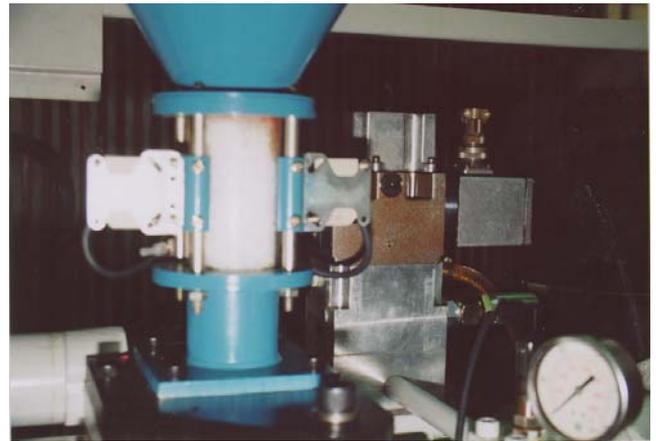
MOOG servo valve on the injection unit of the TMC machine
